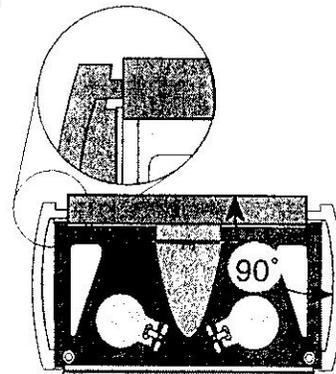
Slide the firebox into position; check the alignment of both sides with the Rear Shroud.
